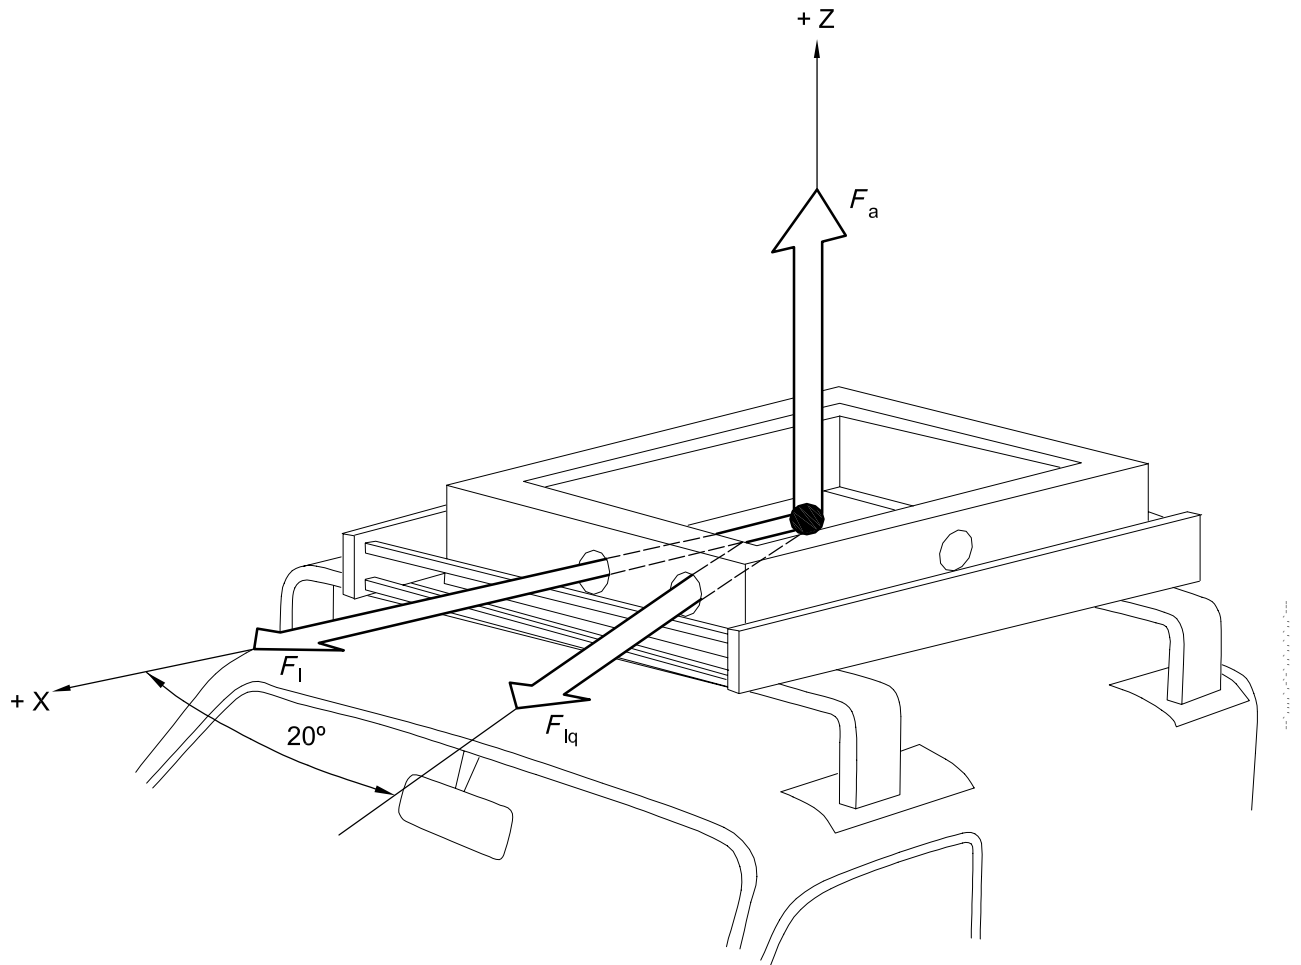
Application of lifting force, F_a , forward longitudinal force, F_l , and 20° horizontal force, F_{lq} , for testing magnetic roof racks
